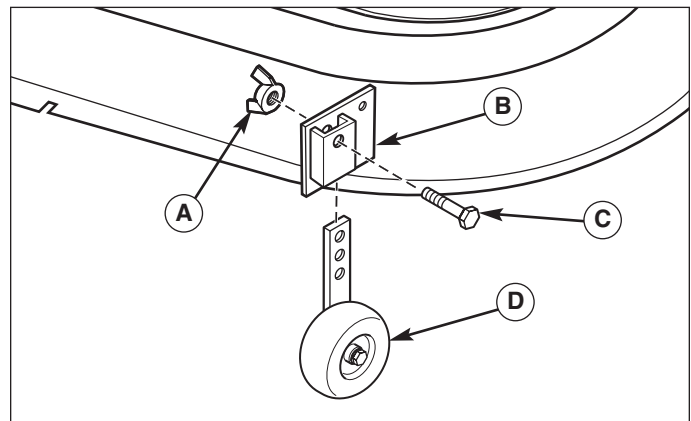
Sliding Bracket Gauge Wheel Adjustment
